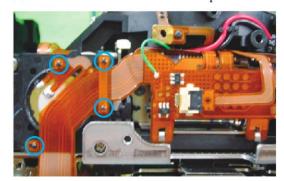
Auto Focus FPC Ass'y Assembly 4
